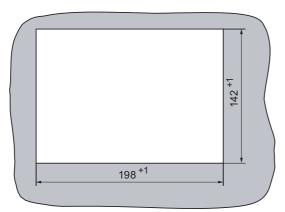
Mounting cut-out for the TP 177A and TP 177B in horizontal format
